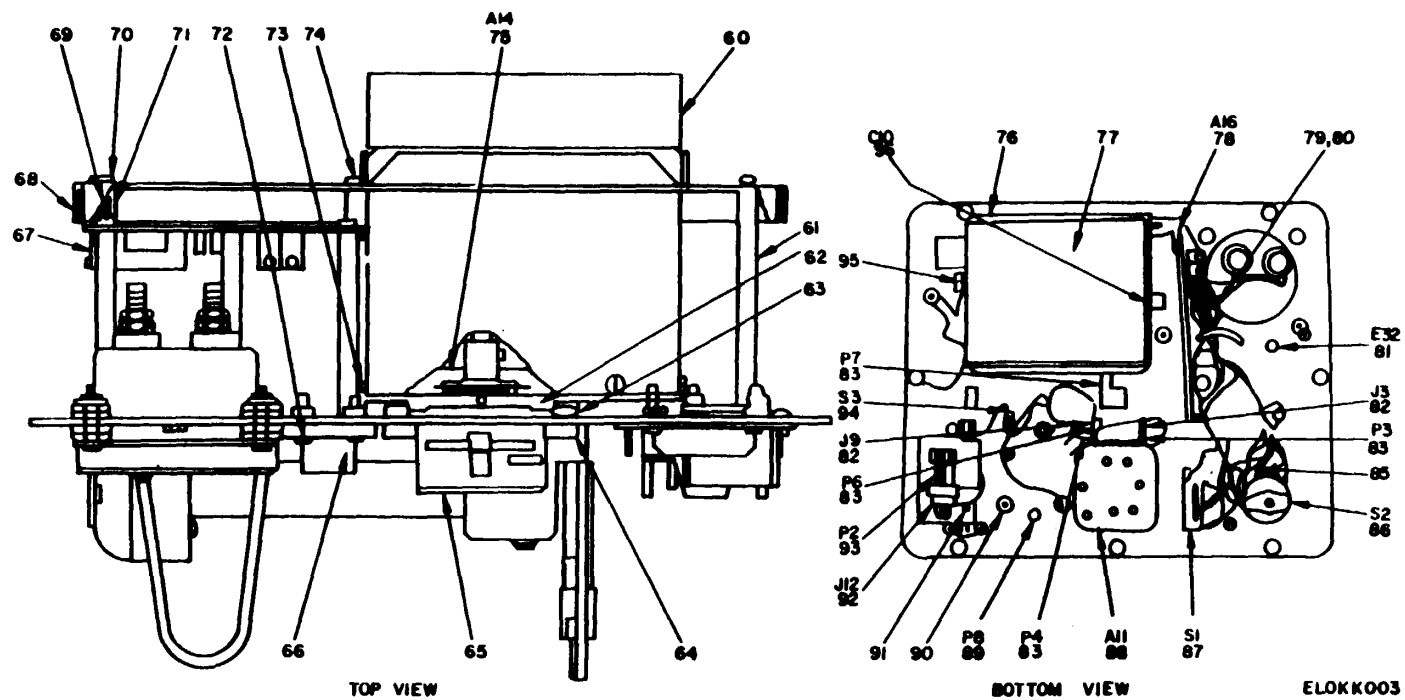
Top Plate Assembly (Sheet 2 of 2).
